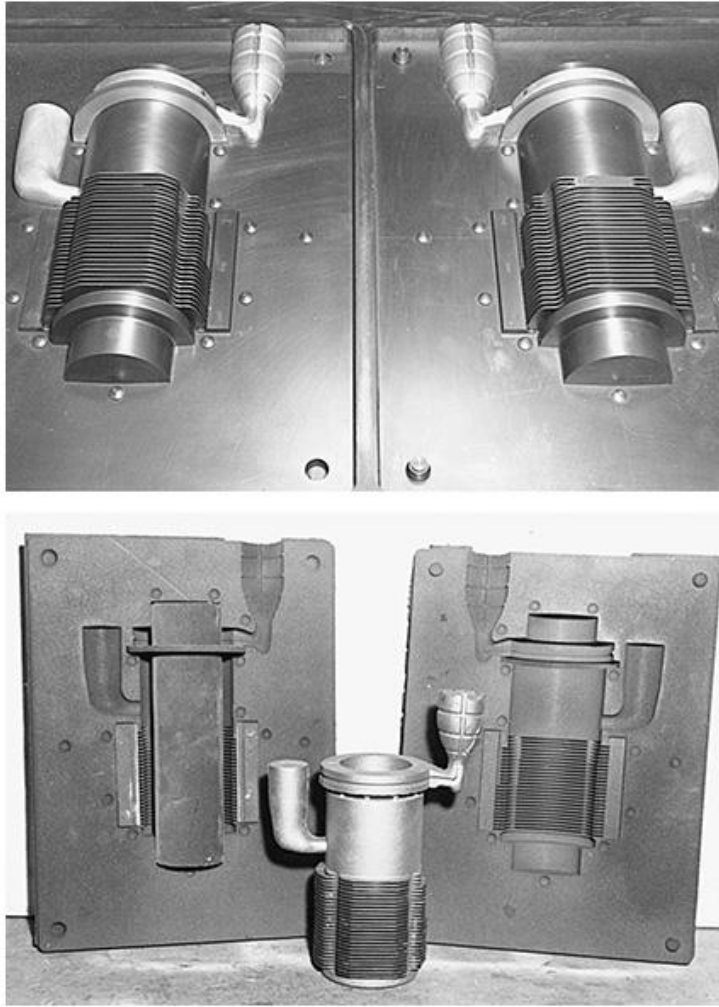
(Top) Two halves of a shell-mold pattern. (Bottom) The two shells before clamping, and the final shell-mold casting with attached pouring basin, runner, and riser. (Courtesy of Shalco Systems, Lansing, MI.)
